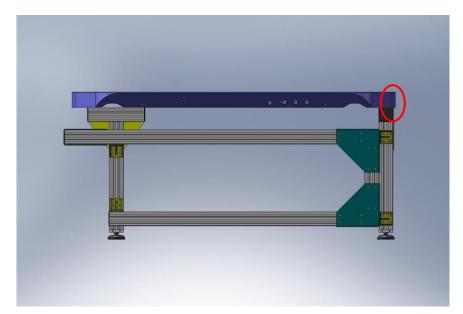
Back edge of Stage 0 Base should be close to back edge of Assembly Stand.
